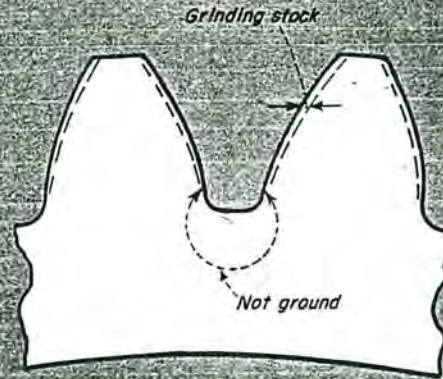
Exaggerated form of involute gear tooth cut with a protuberance hob. Involute profiles can be ground without grinding vulnerable root areas.
